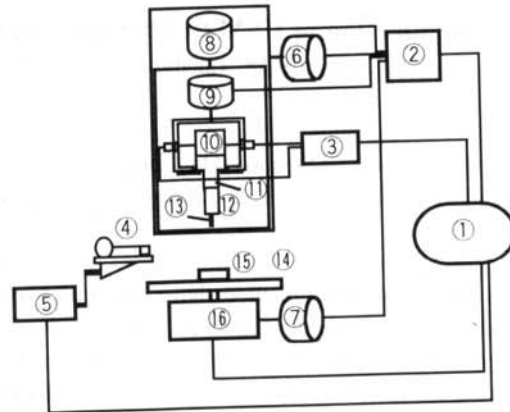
Micro-USM achieved by fabricating microtools on the machine.
